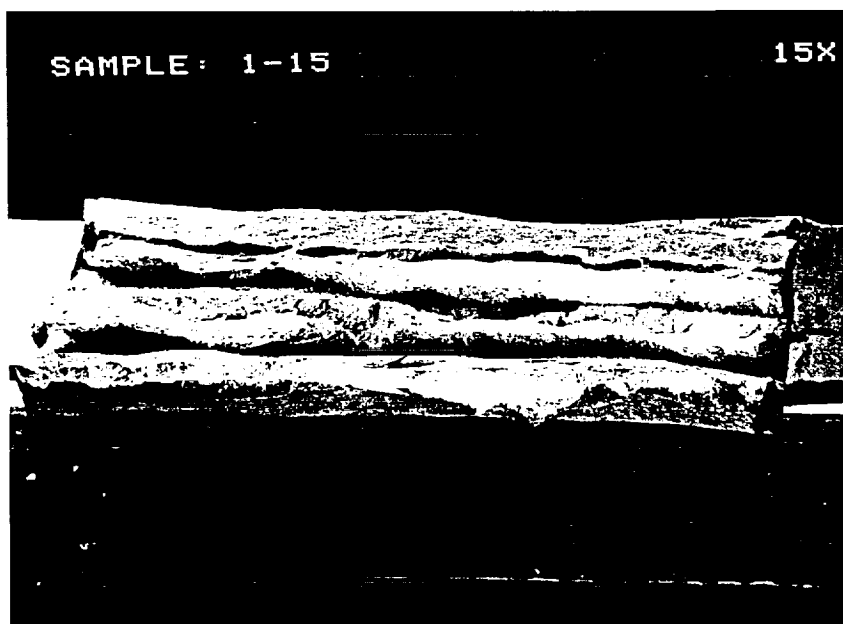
SEM view of fracture in tensile specimen 1-15, 3400F, annealed. 20X.
